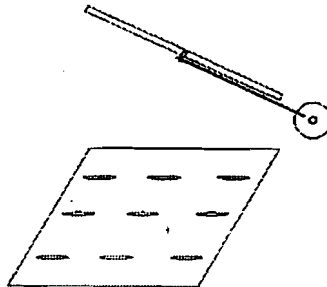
The cleaning device in machine for separating flax fibers fabricated.
